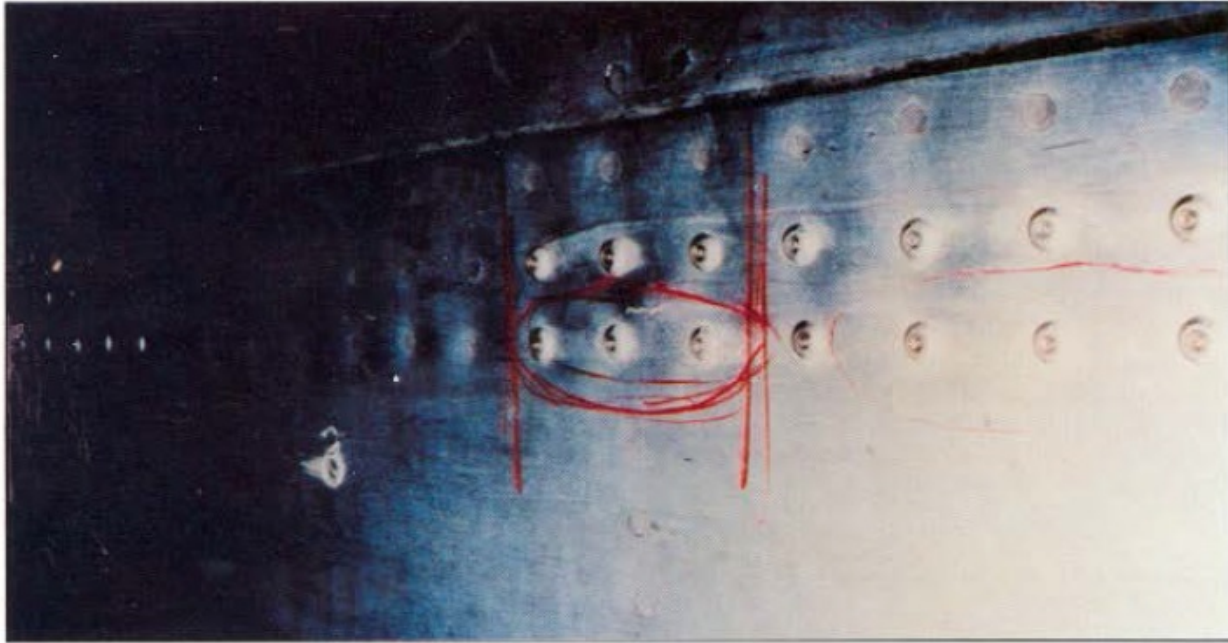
Typical Damage to Floor Around Lavatories, Buffets, and Galleys
